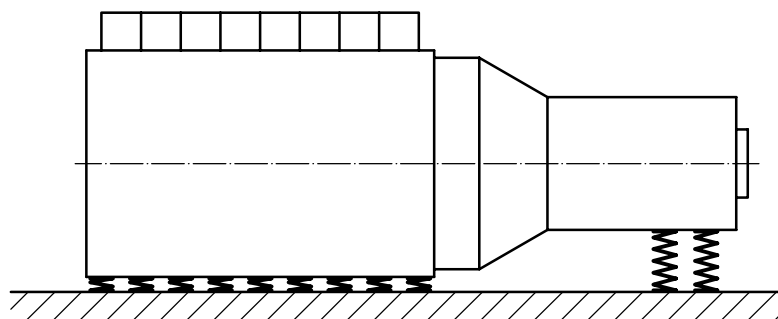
Assembly with flange housing and resilient mounting on the engine and generator
